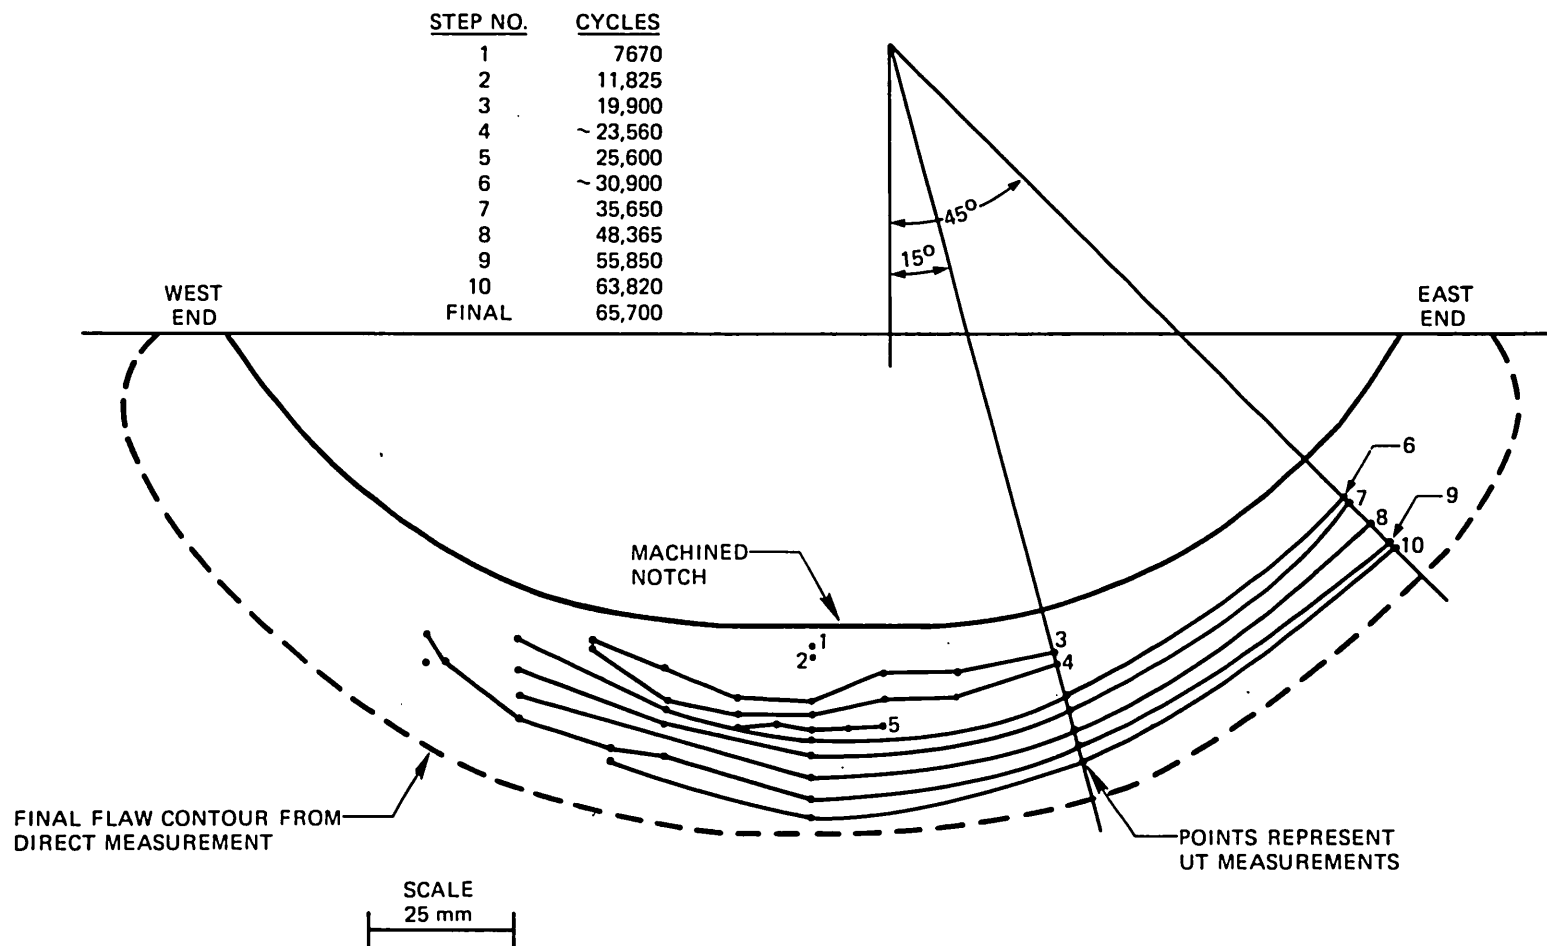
Flaw growth observed ultrasonically for various stages of fatigue cycling in weld V872.
